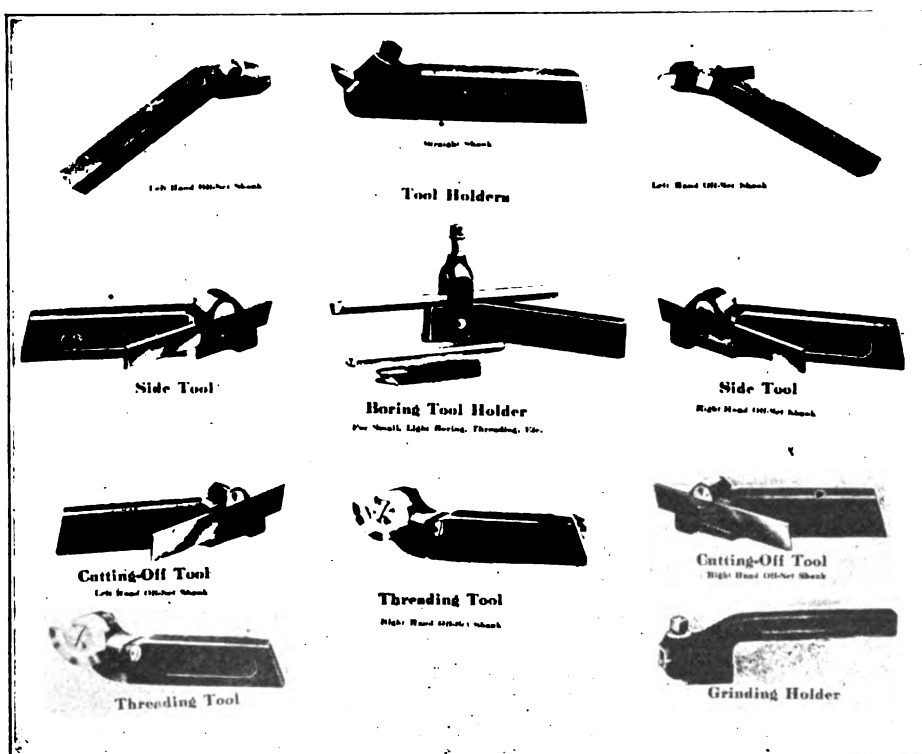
Tool Set Necessary for the Successful Operation of Engine Lathe.
